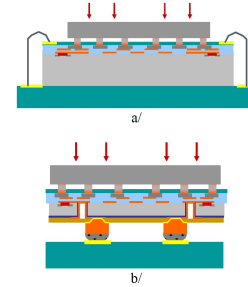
a/ Current assembly of sensor to readout circuit, b/ New assembly of device connected by the solder BGA on the back side of the readout circuit chips using TSV
